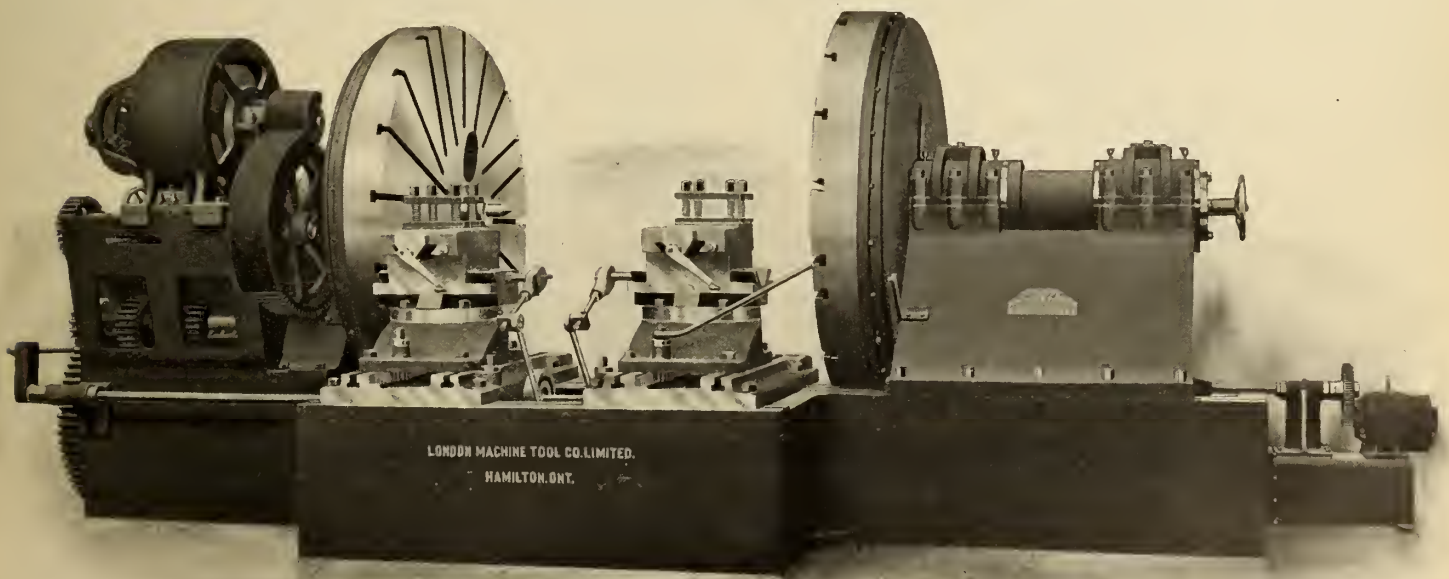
Ninety-inch Wheel Lathe, London Machine Tool Co.
